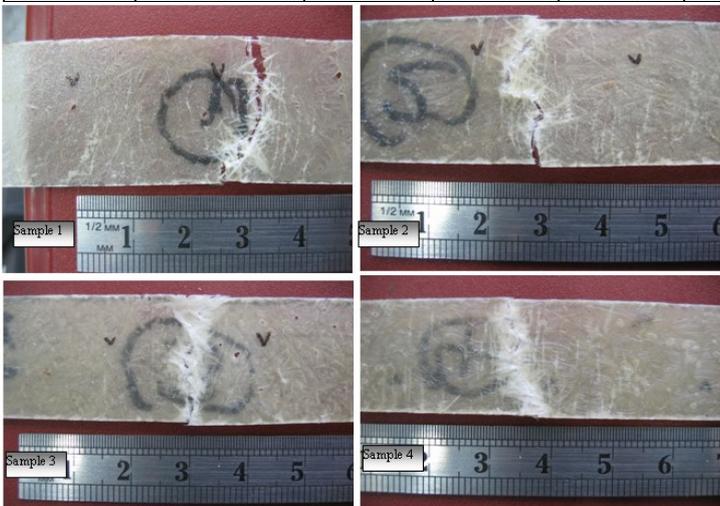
Macroscopic fracture section shape of the samples from the tensile test / Forma secțiunii de rupere la nivel macroscopic din solicitarea la tracțiune.
